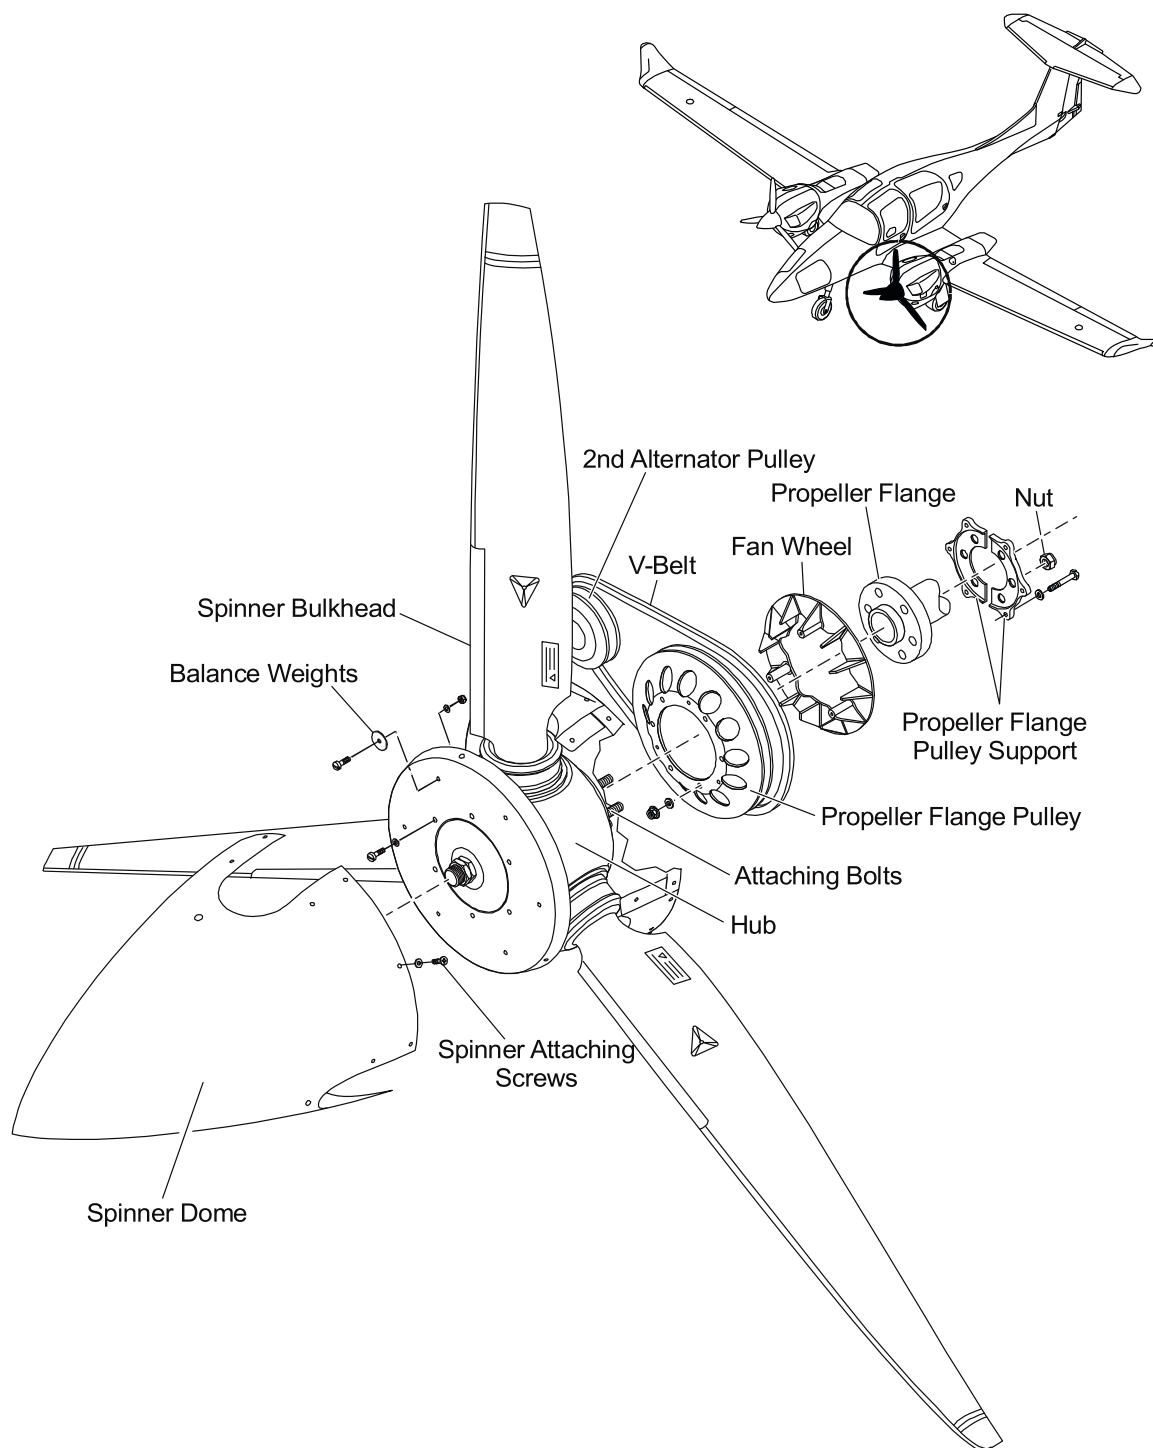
Propeller Assembly (if OÄM 62-006 is installed)
